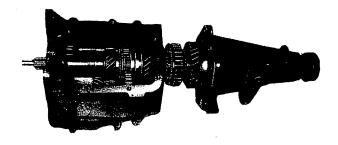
B-46 - Removing Clutch Gear and Mainshaft
